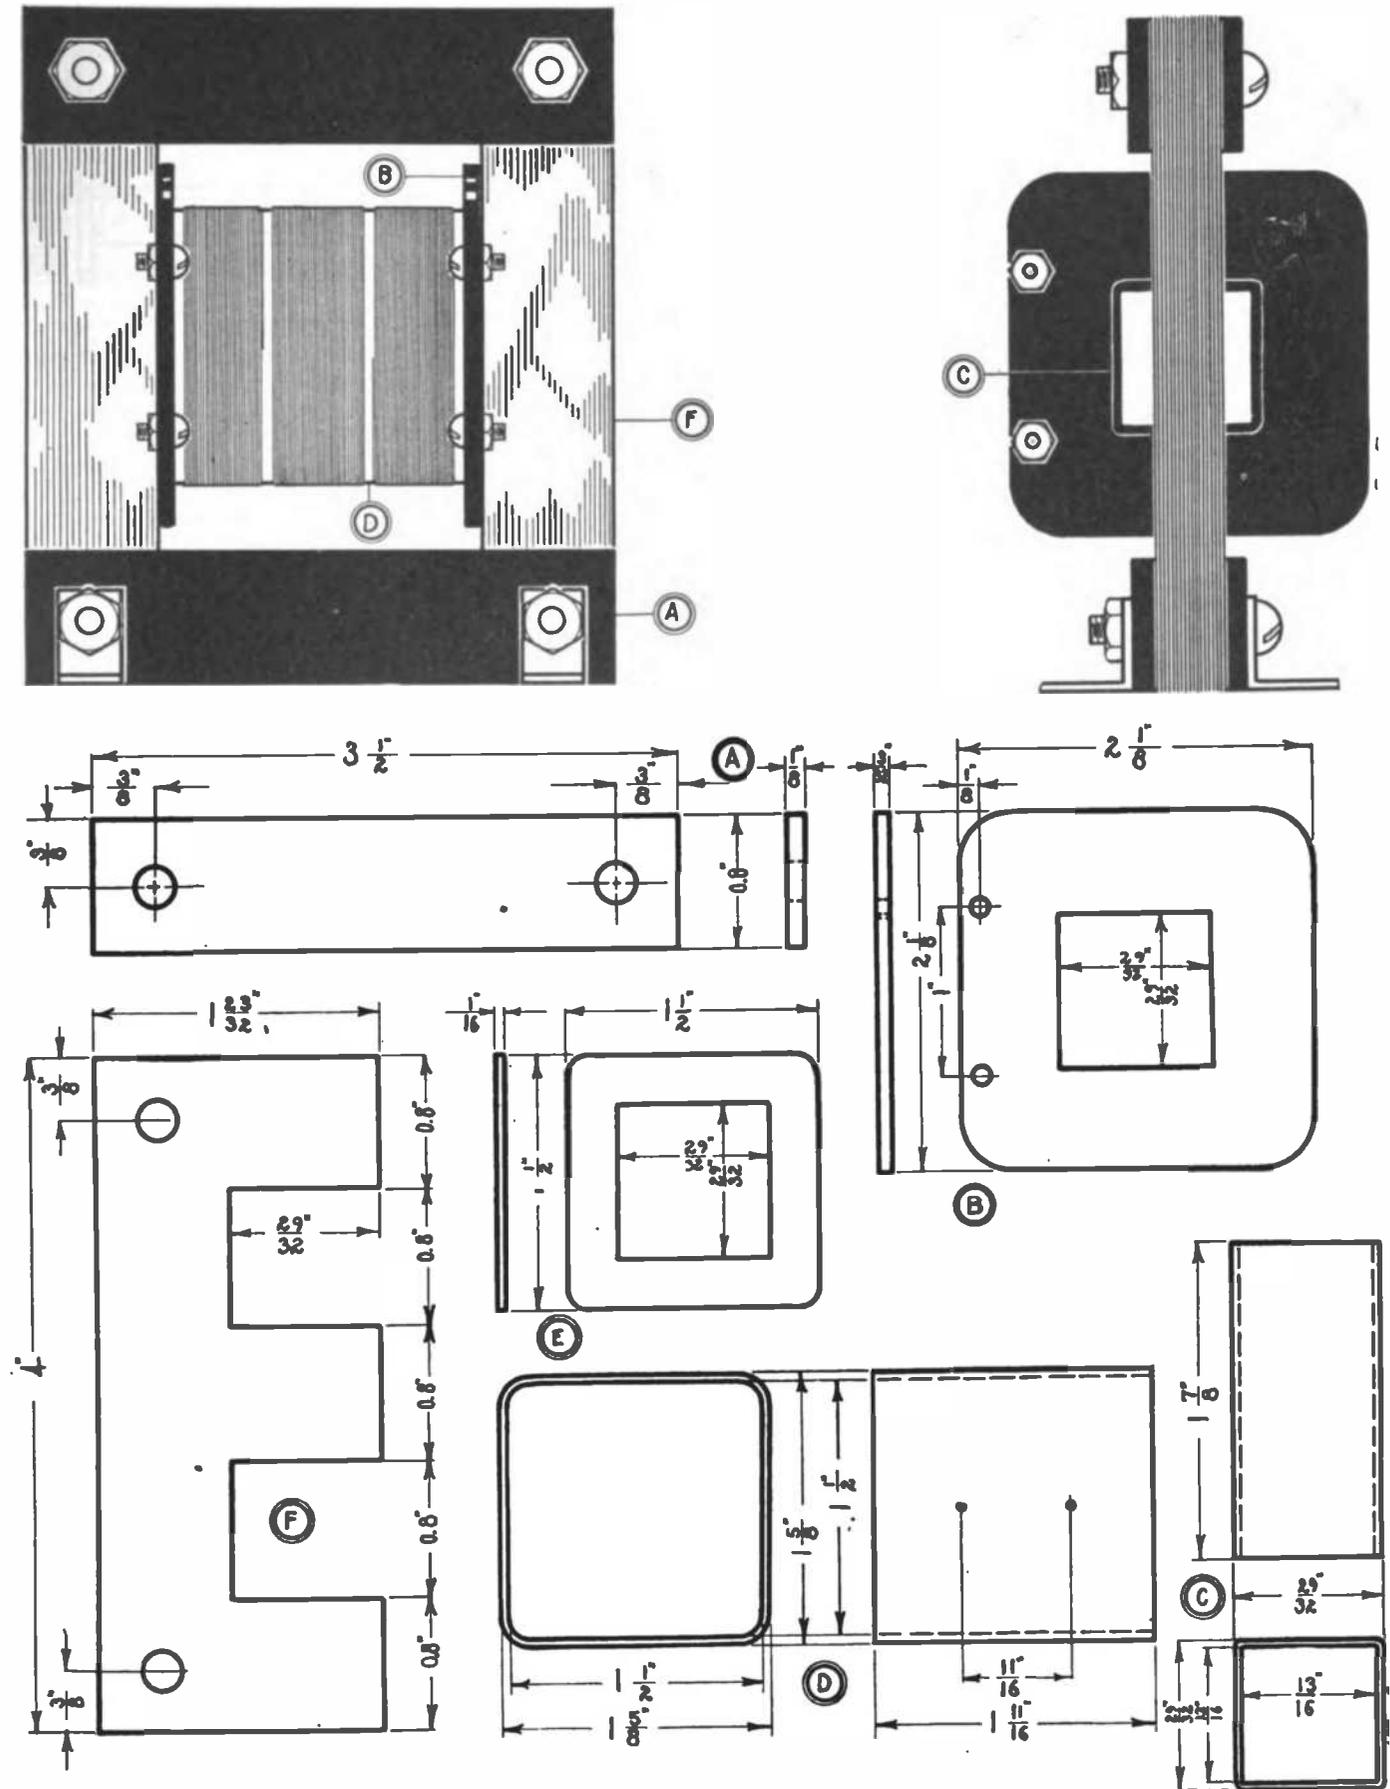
The letters on the assembly refer to the details. This instrument calls for no difficult construction or expensive parts
